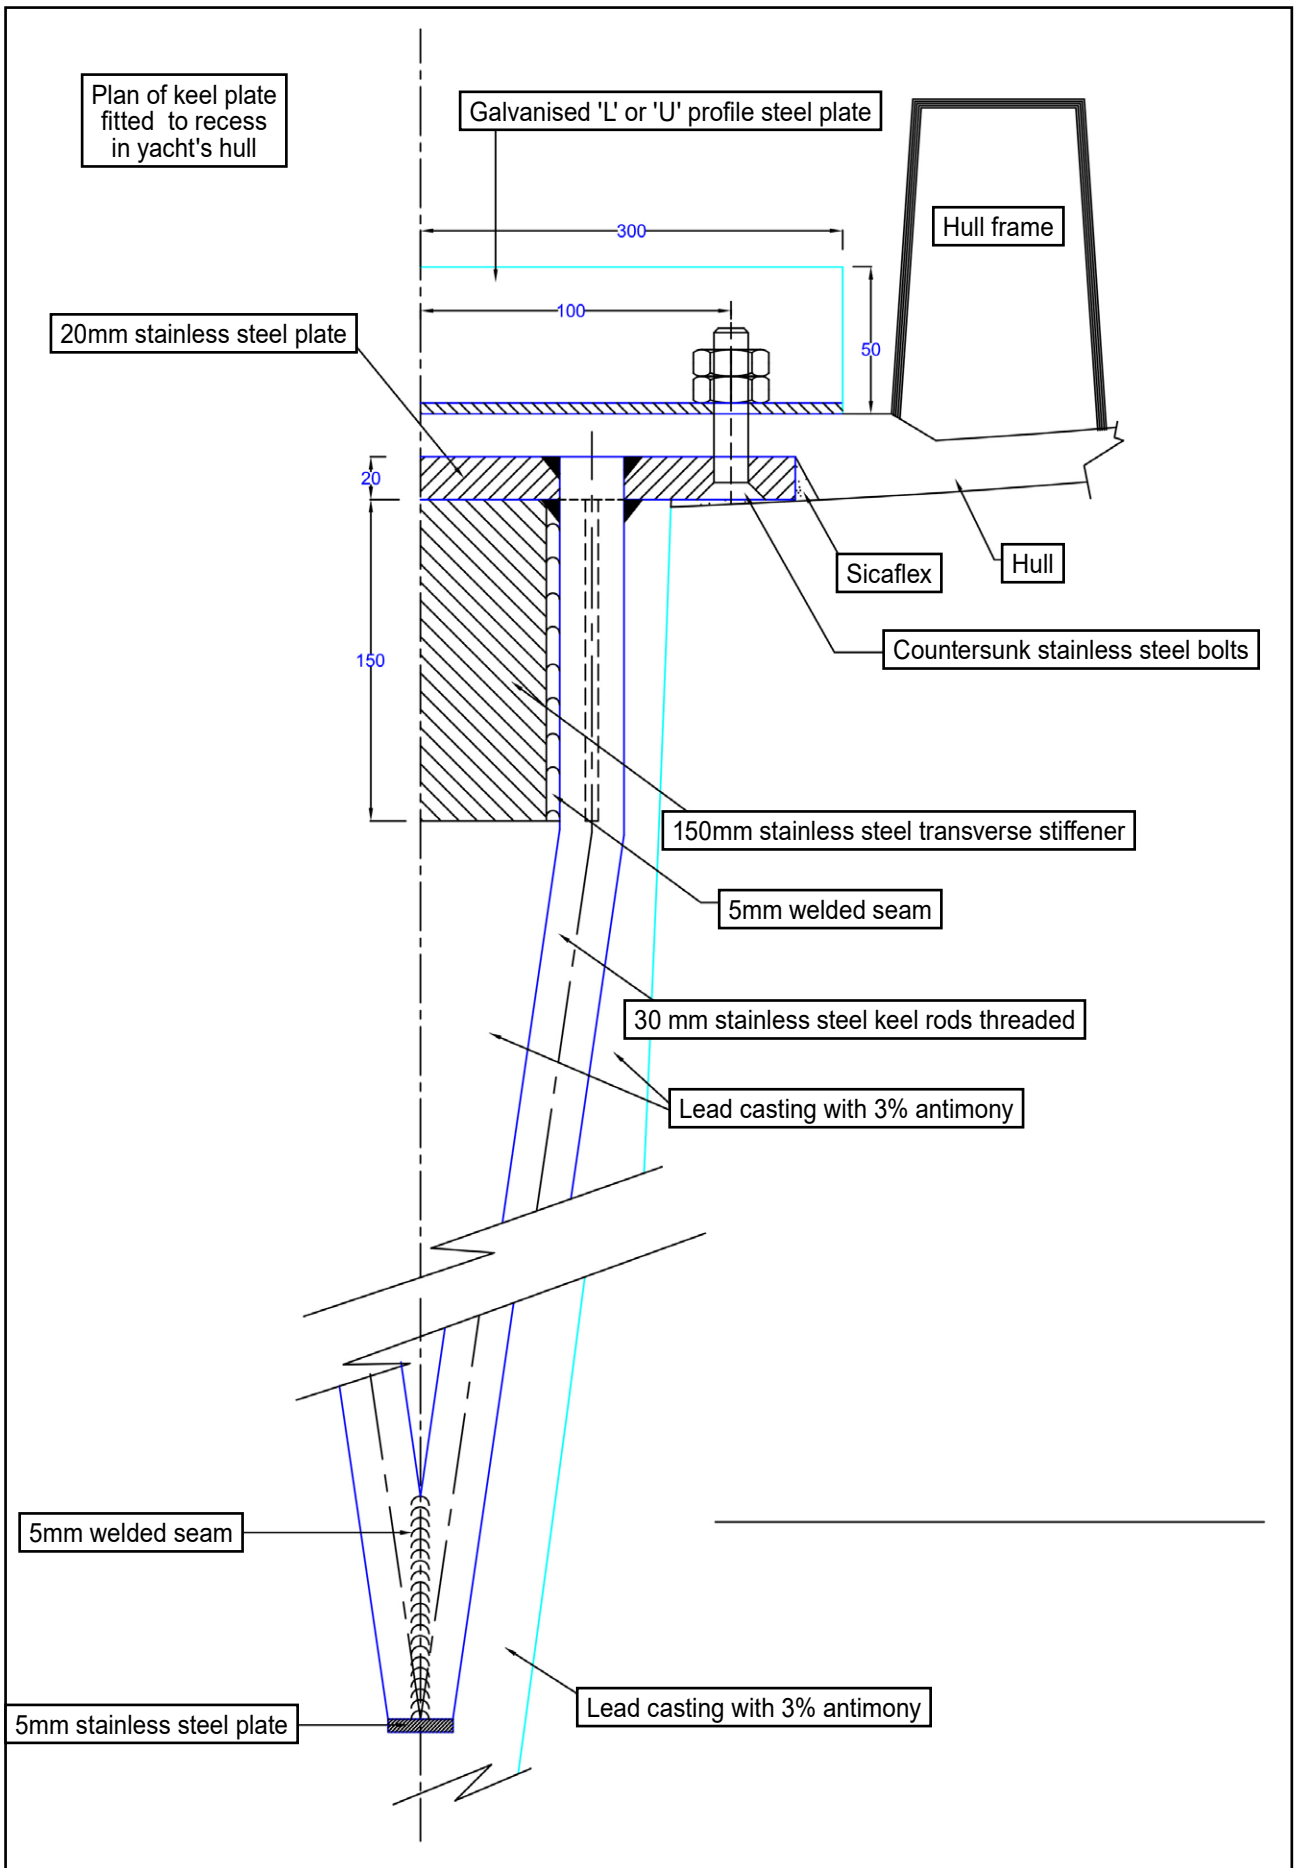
Drawing showing cross-section of Comar Comet 45S shallow draught, lead, cruising keel
